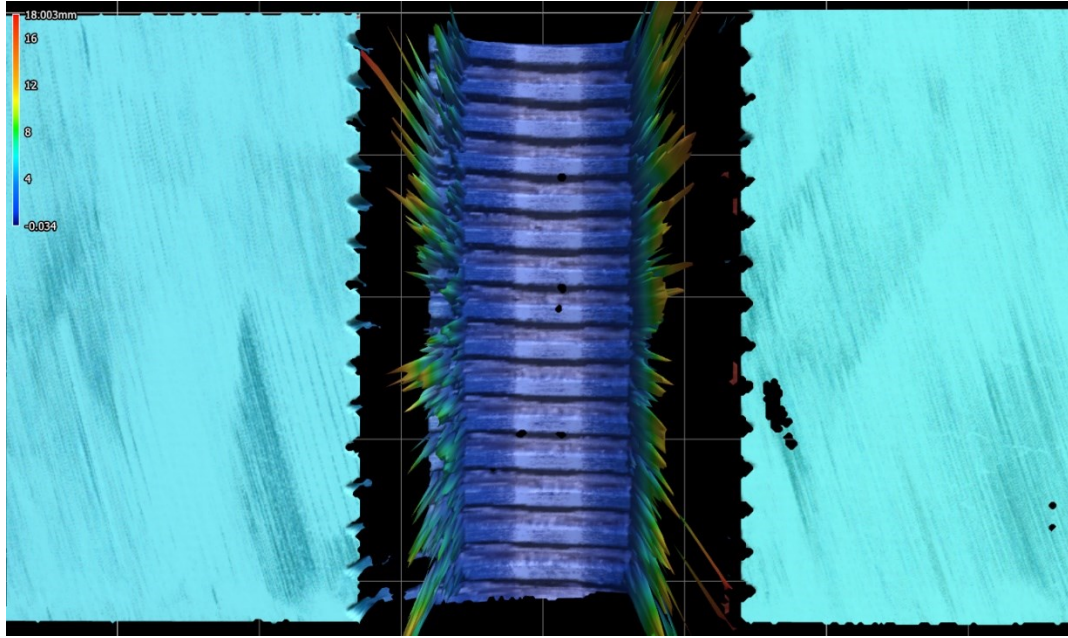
Specimen 7A hole 13 cross section 3D scan.
